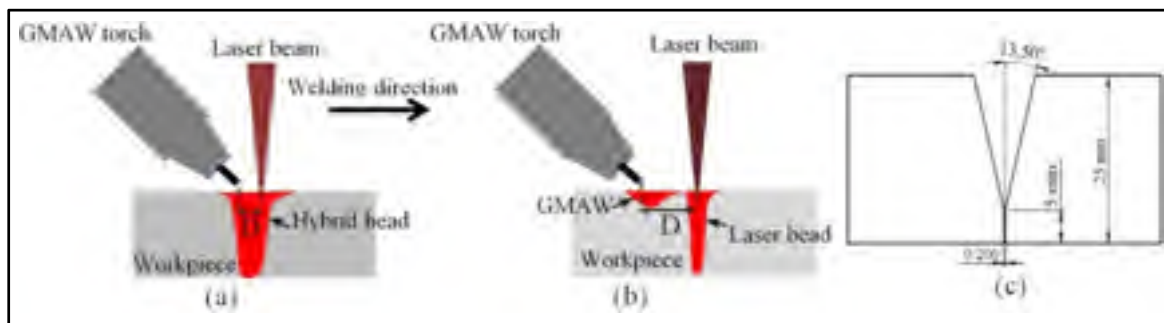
Schematic of (a) hybrid welding, (b) tandem welding, and (c) groove design
